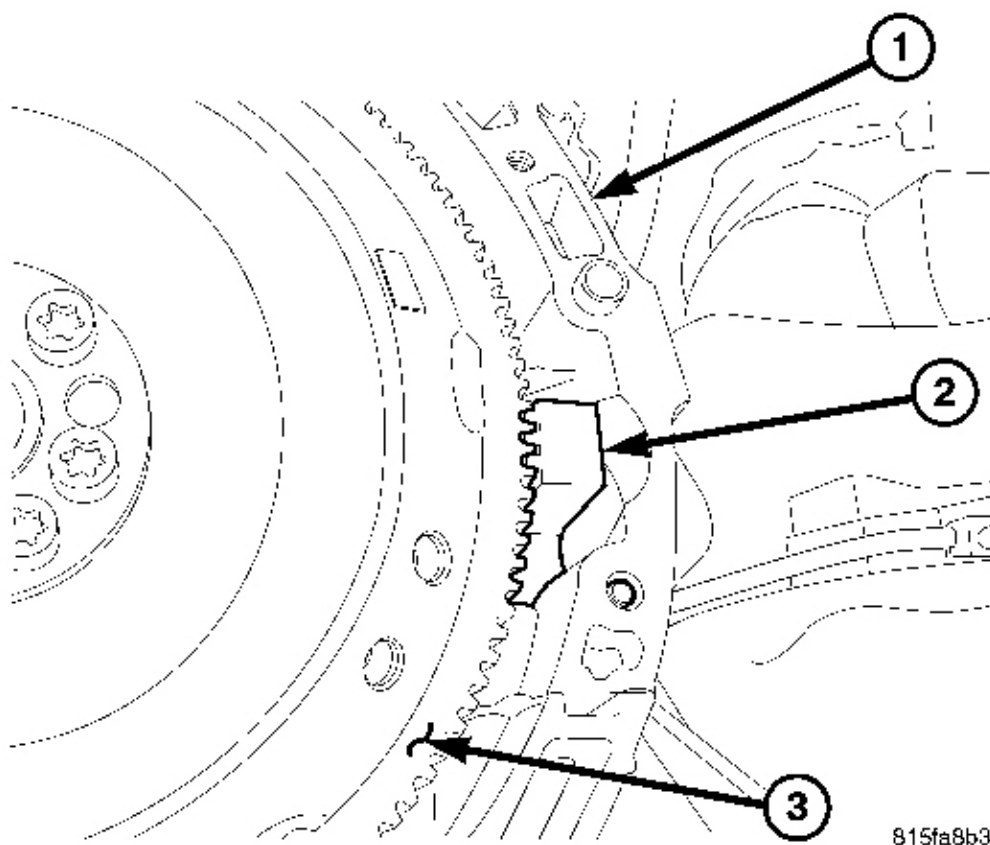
Engine Block, Special Tool #9102 & Flex Plate
